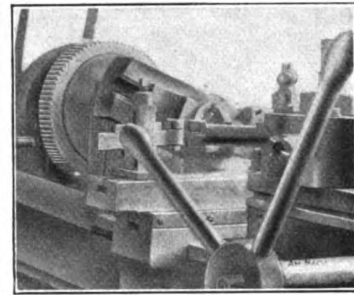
TURRET LATHE "SET UP" FOR MACHINING MIXING CHAMBERS
